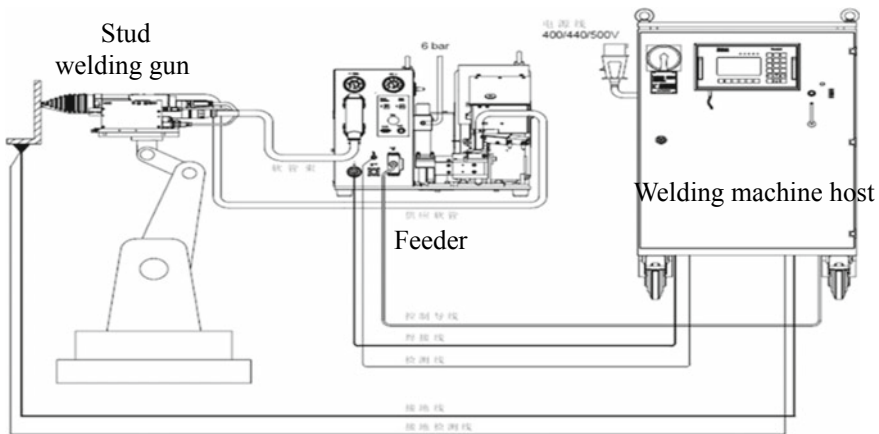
Configuration of the “fixed welding gun” stud-welding machine (TUCKER DCE1800)
